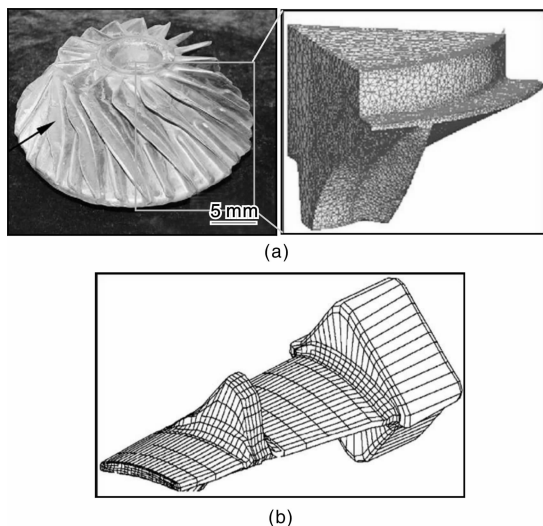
Large-scale complex-shaped titanium components forming by isothermal forming technology (a) Ti-6.5Al-3.5Mo-1.5Zr-0.3Si impeller and (b) TC4 blade
